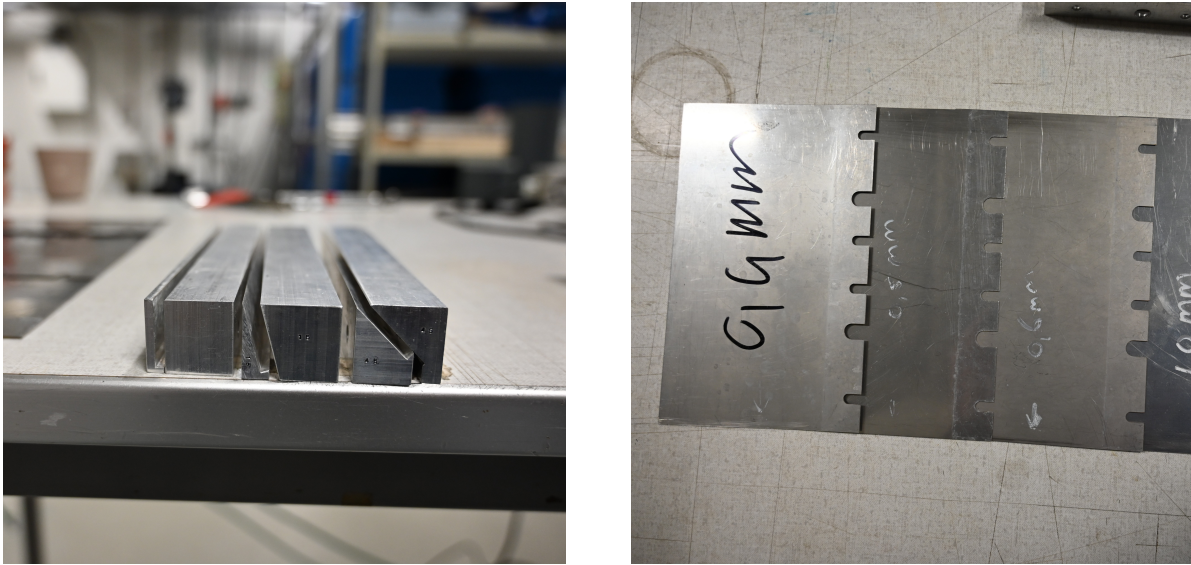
(a) Machined parts that were used to clamp the plates at angle $\theta = 0^\circ, 15^\circ, 30^\circ$ or 45° . (b) Plates of varying thickness that were used in the impact experiments.
